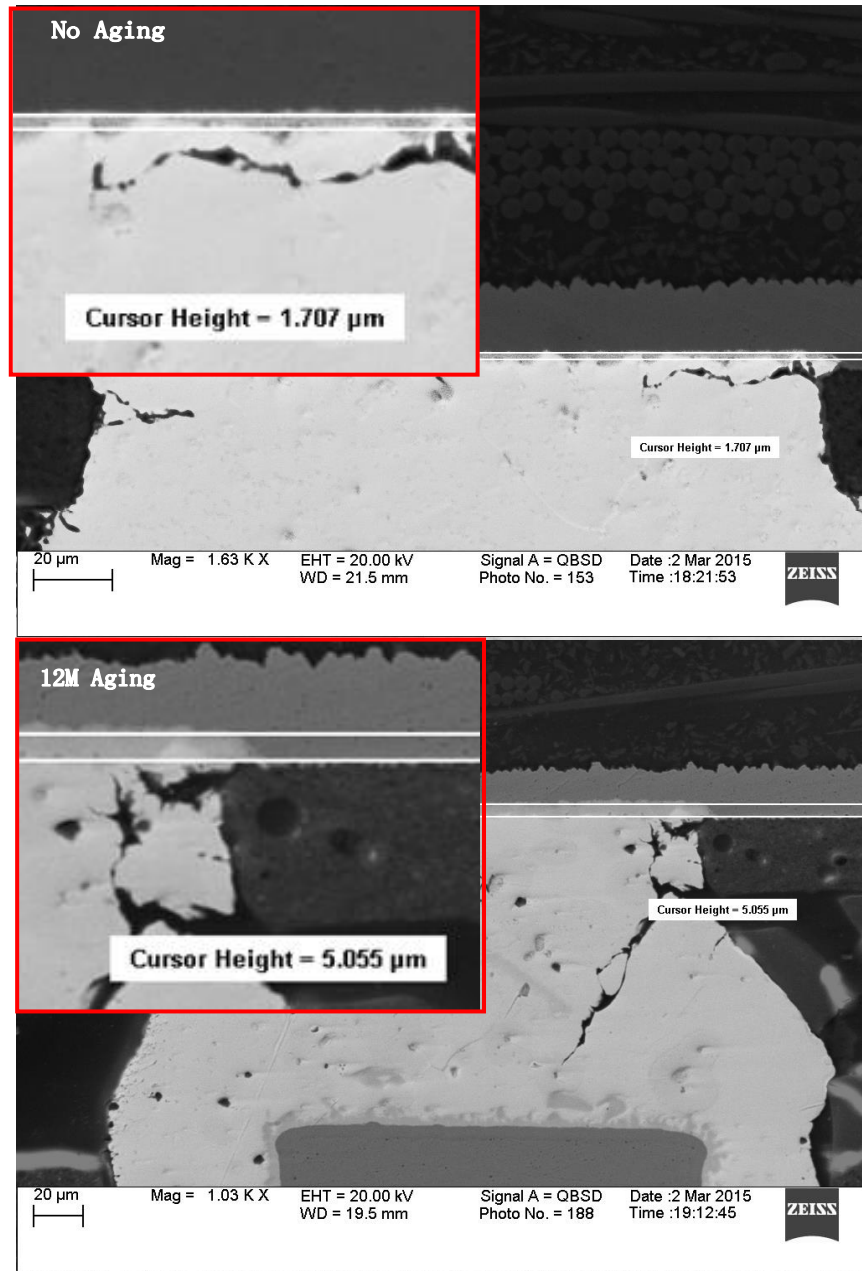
IMC thickness growth with ENIG finish on package (top) and board (bottom) side for 15mm solder balls.
